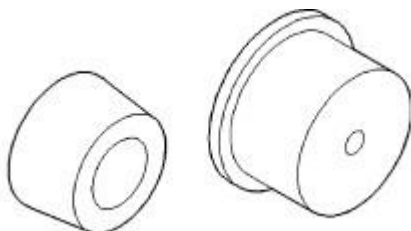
Rear Crankshaft Seal Guide and Installer 6926-1 and 6926-2
